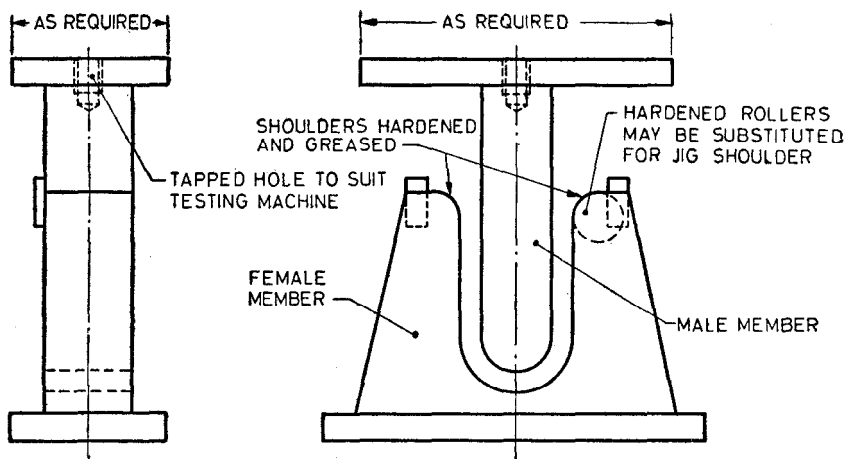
TYPICAL JIG GUIDED-BEND TEST
